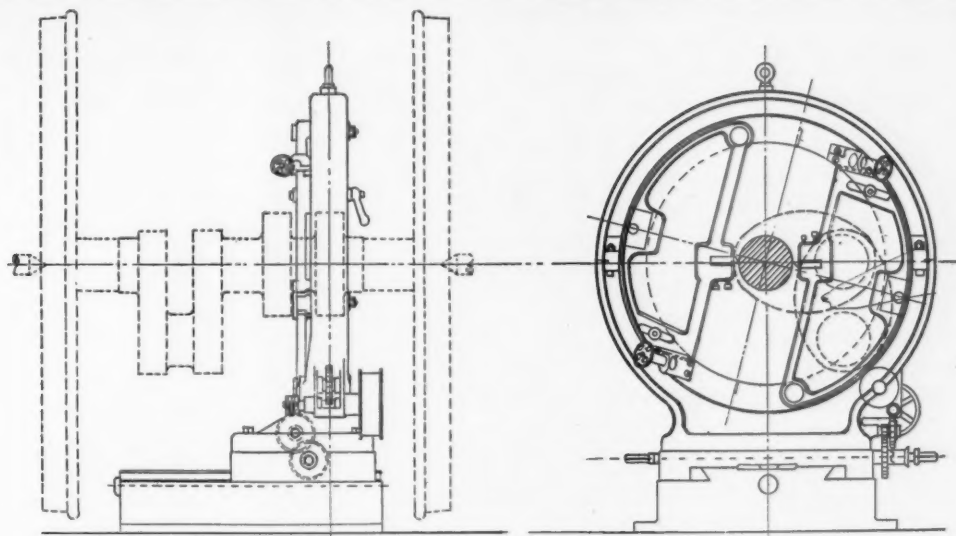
AN EUROPEAN CRANK AXLE RE-TURNING MACHINE.
